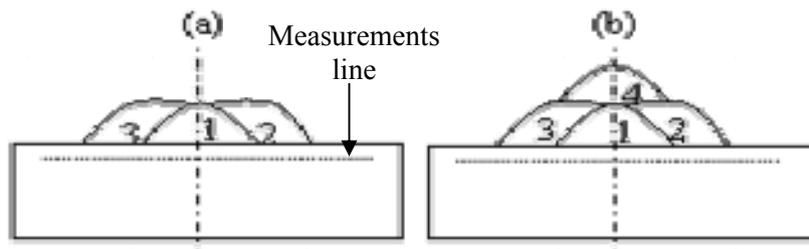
Illustration of the weldments: (a) Sample I and (b) Sample II
